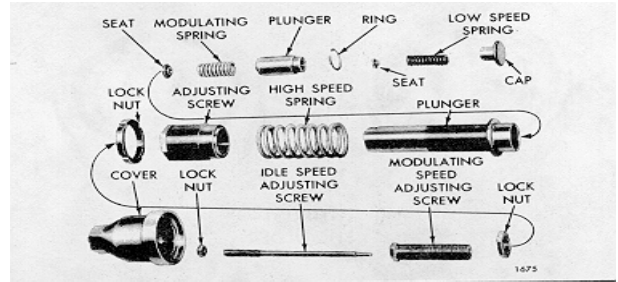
Governor Springs, Plungers and Adjusting Screws (Fuel Modulating Governor)
